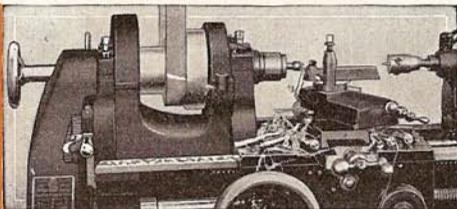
Manufacturing Small Duplicate Parts from Bar Steel Held in the Draw-in Chuck.
